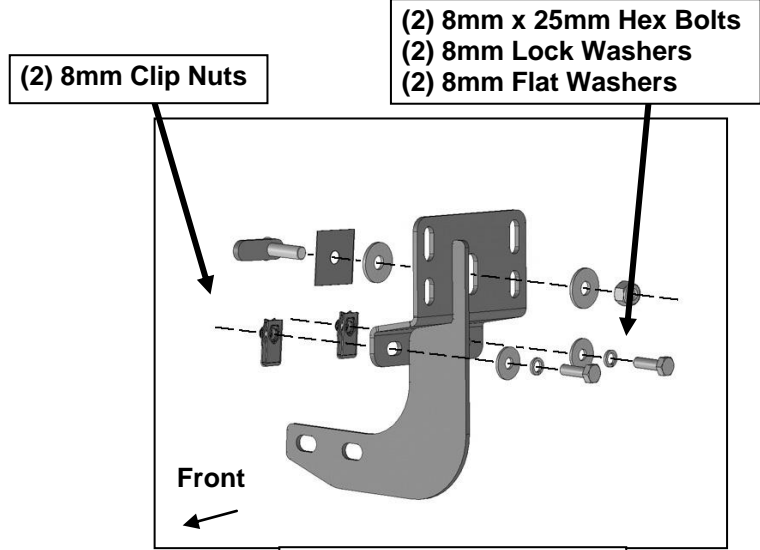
Push all Brackets up tight against body panel. Mark location of bottom slots onto pinch weld
